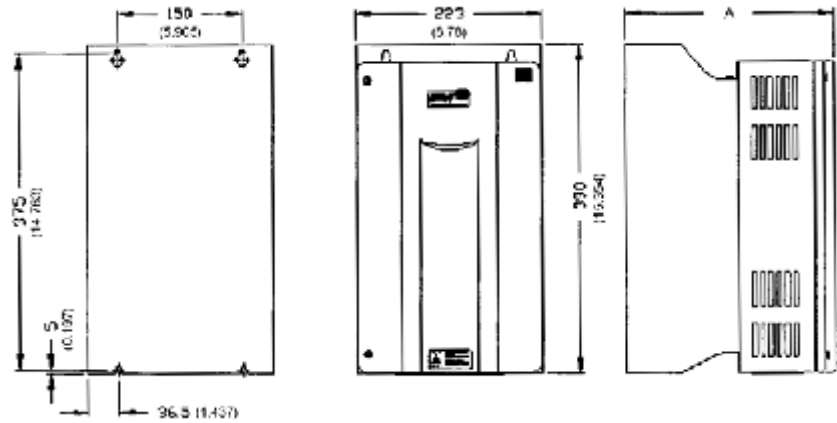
Dimensional Drawing of DBW-01 and DBW-02 - mm (inch)
